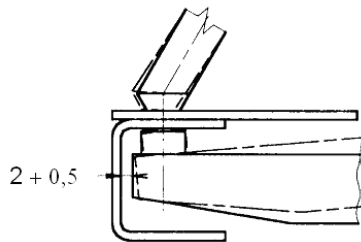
Poor weld quality caused by electrodes that spring back and slide
